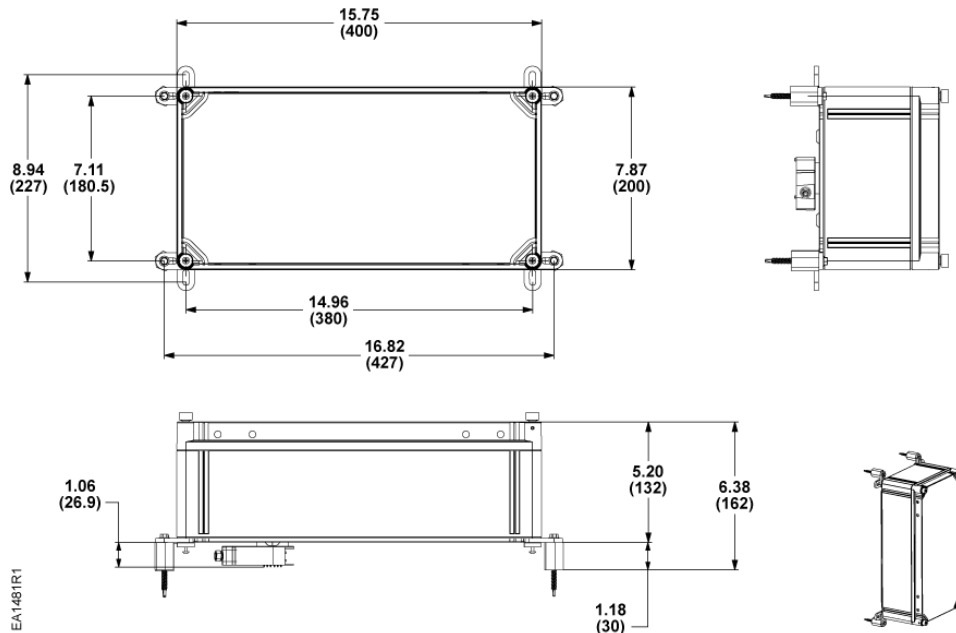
Dimensions of the ASK75.7U Weather Shield in Inches (Millimeters).
